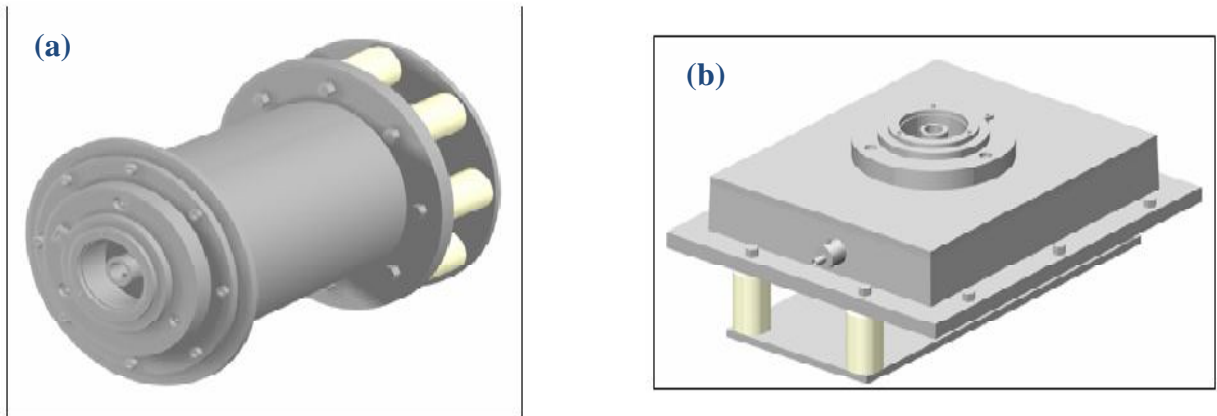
(a) Cylindrical mold (b) Flat plate mold
